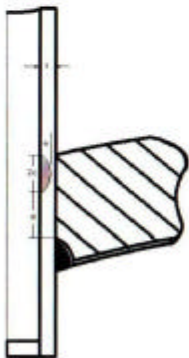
Inside, Axial Surface Flaws, .5" Above the Attachment Weld, Nozzle Uphill Side - Crack Growth Predictions
